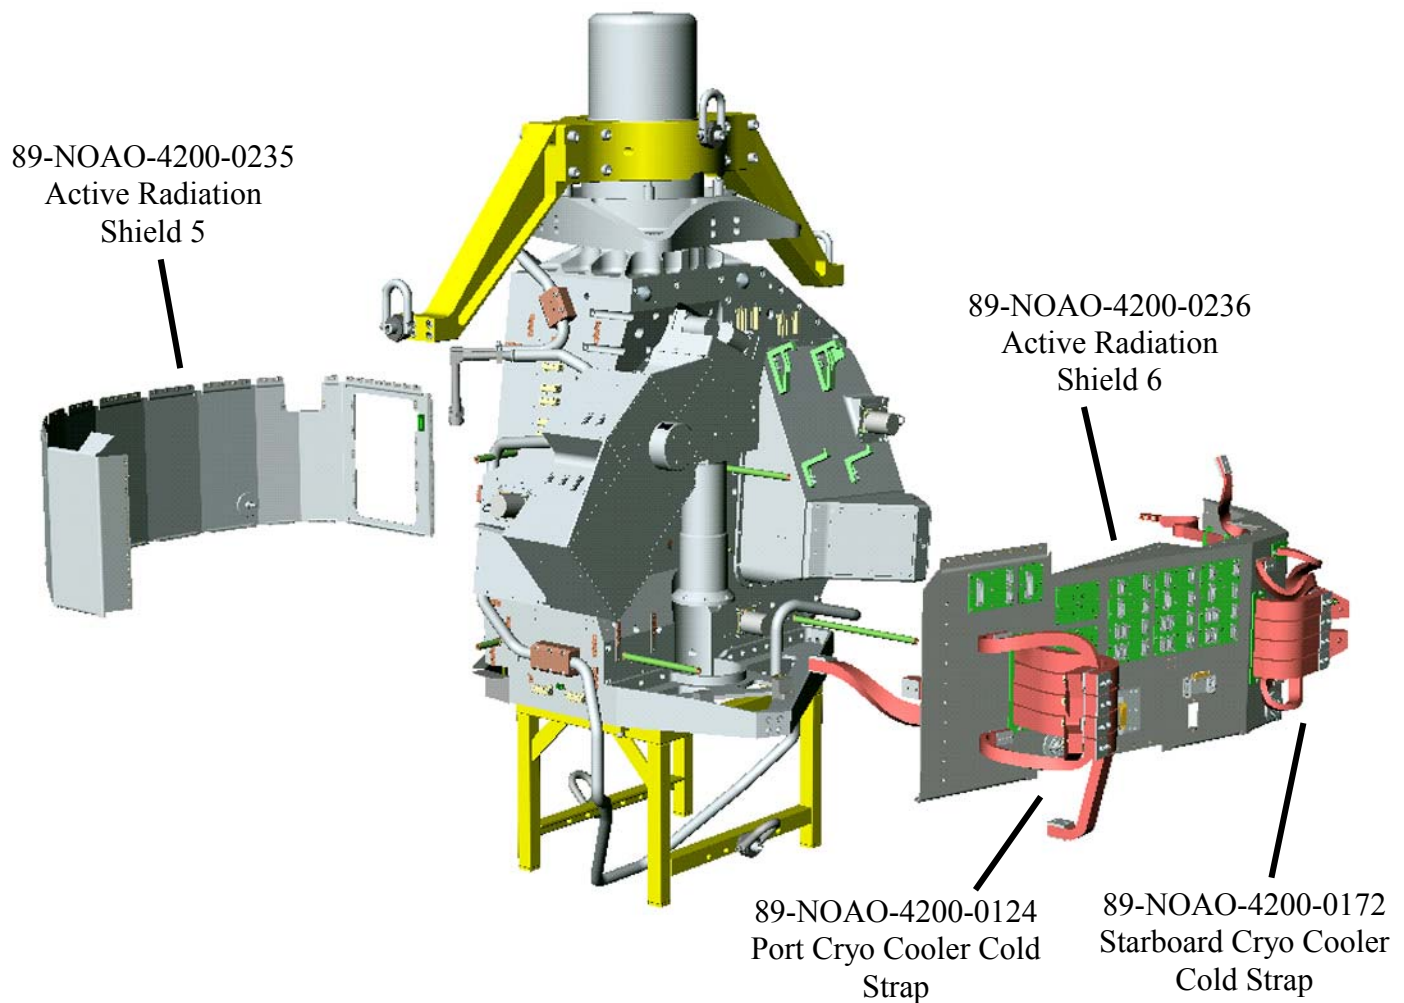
Remove Active Shields and Cold Straps
